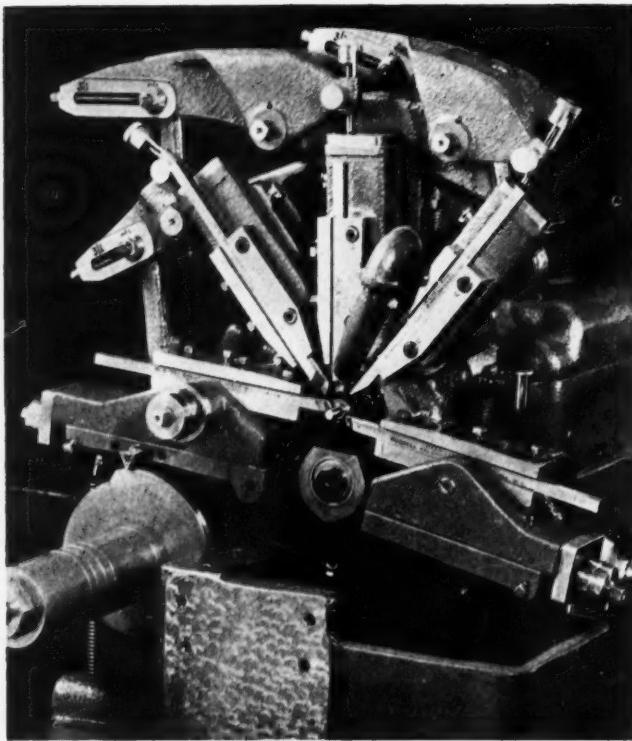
Close-up View of Tool Set-up on Gorton Precision Automatic Screw Machine Illustrated in Fig. 1
